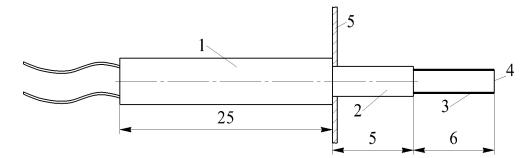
Design of single-thread constant-temperature hot-wire anemometer sensor for determining air flow velocity: 1—sensor base; 2—ceramic insert; 3—conductive holder; 4—thread (sensitive element); and 5—vertical diffuser.
